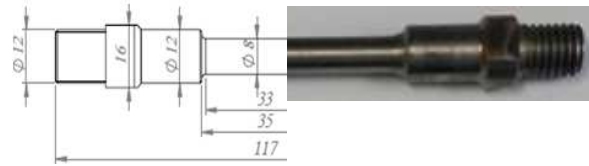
Dimensions of the samples used in the uniaxial tensile tests (mm).
